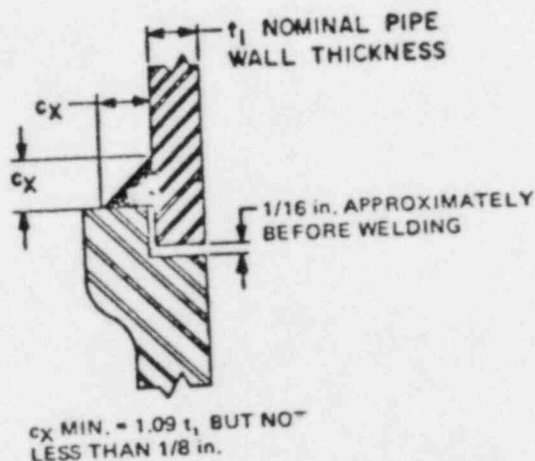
FILLET AND SOCKET-WELD DIMENSIONS
